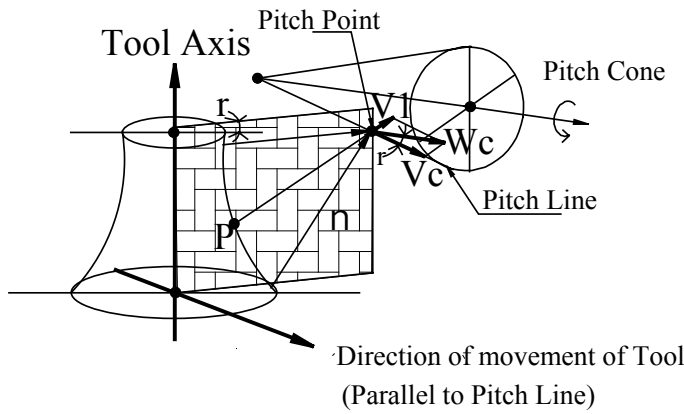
Cutting convex circular arc tooth profile by volcanic shape end mill
